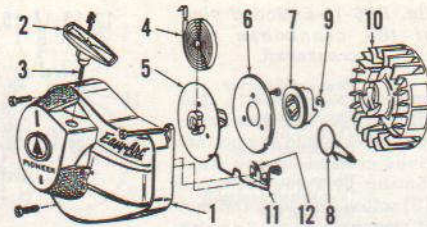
Exploded view of starter assembly used. Parts (11 and 12) are used to operate decompression valve on models with "Easy-Arc" starting.
